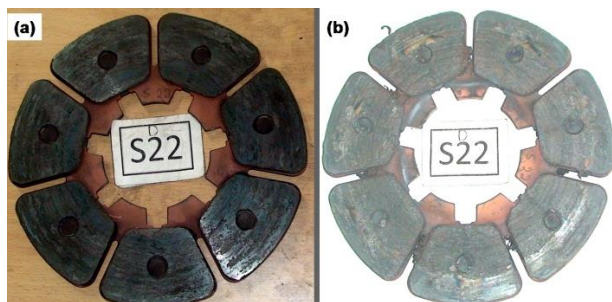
Brake stator showing the assembly of brake pad sectors (a) Pad condition after bedding-in operation before the full scale dynamometer test, Pad shows the uniform tribofilm at the surface, (b) Pad condition after 50 normal energy braking stops and one rejected take off stop, Pad shows the chipped-off regions, edge cracks, abrasive grooves, and ploughed regions with extensive oxide scales.
